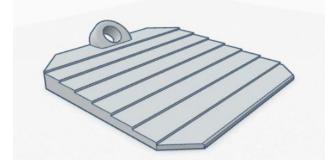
Multi level shim design used to help align the IC profiler. This is a 3D printable design.
